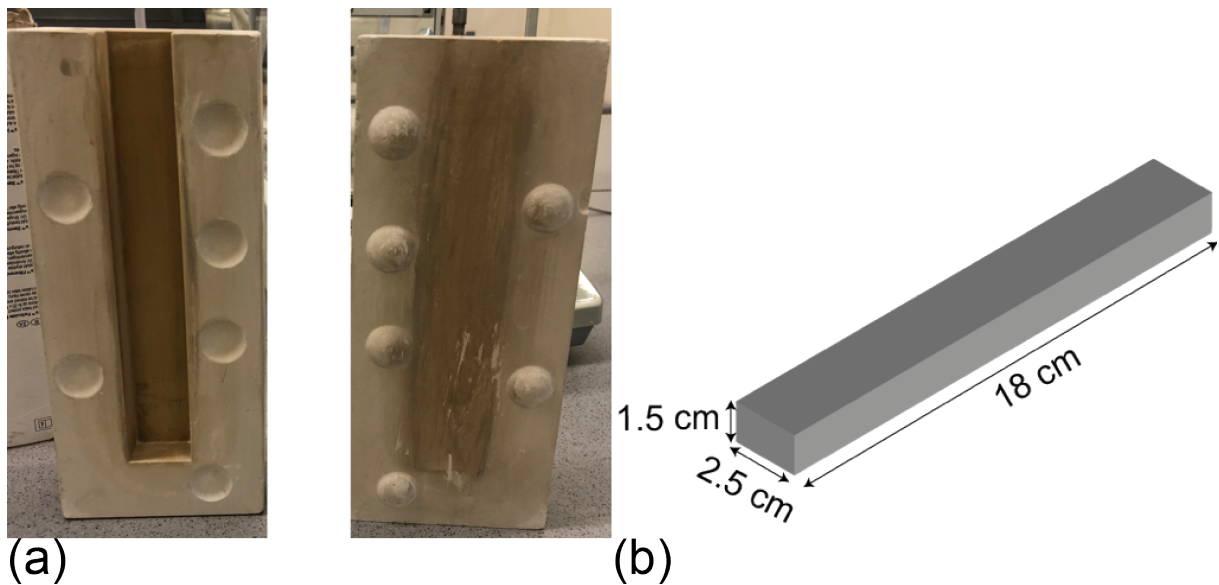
(a)Plaster moulds used for slip casting and (b) the resulting shape and dimensions
